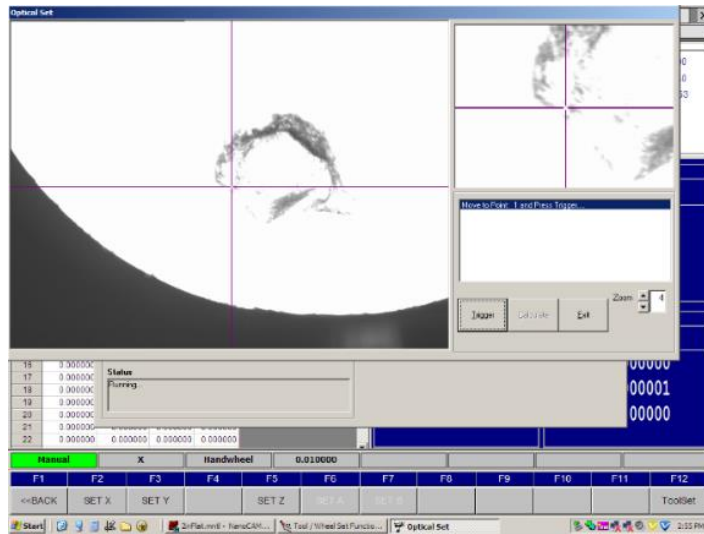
A 0.5 mm radius diamond tool with tool wear around the center of the tool profile.
